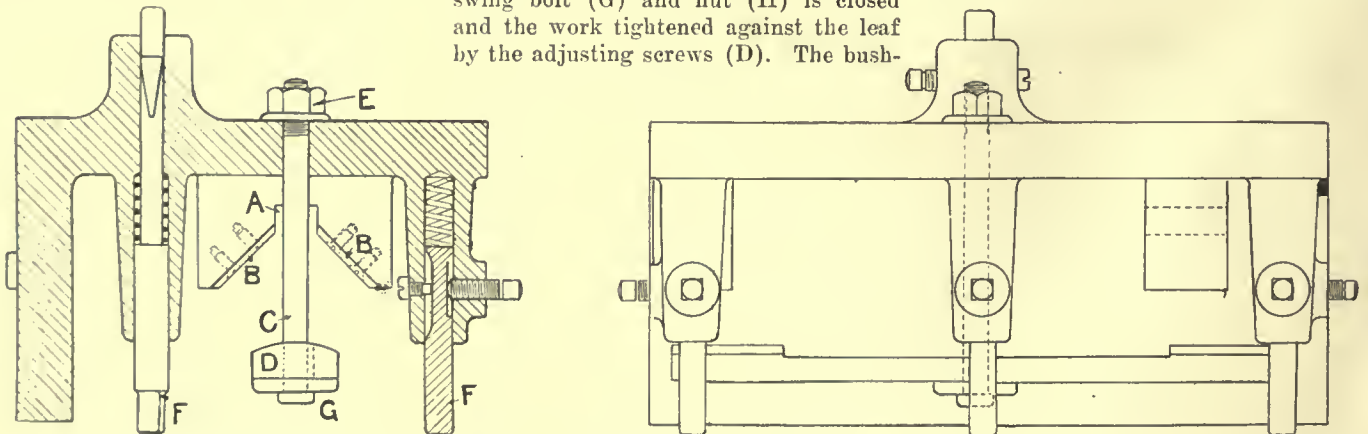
MILLING FIXTURE FOR CRANK CASE.
